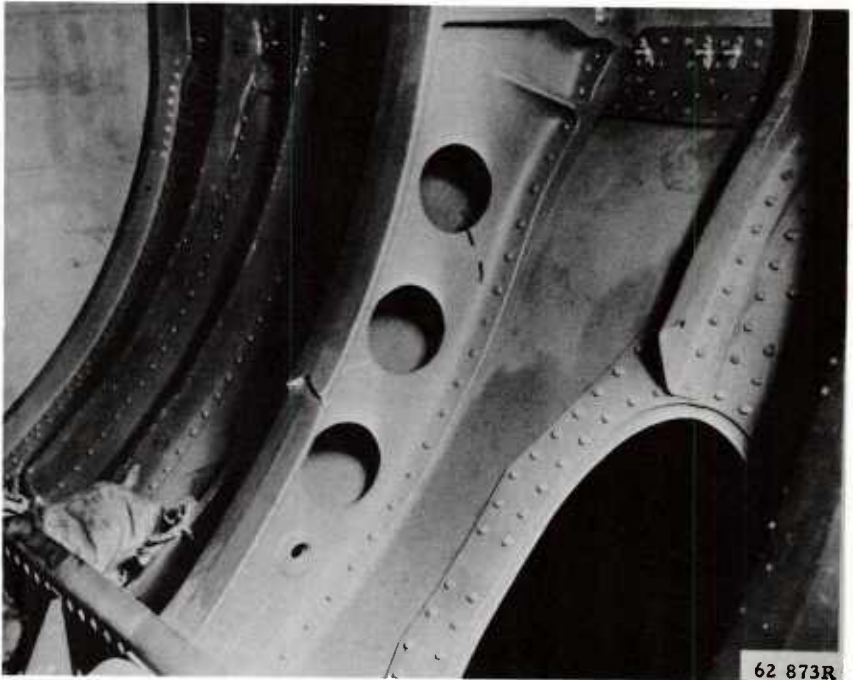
Fatigue failure in a fuselage ring—crack from large hole to stiff flange.
